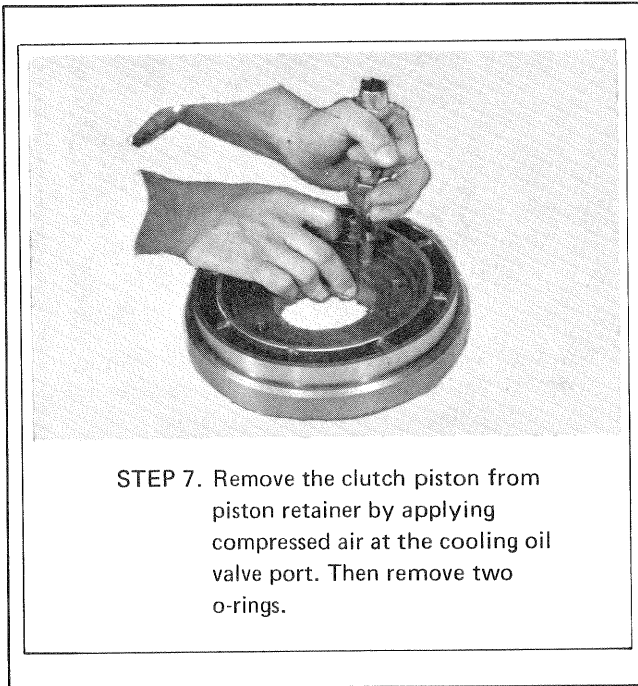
DISASSEMBLY OF CLUTCH ASSEMBLY (POWER CONTROLLED WINCH)
